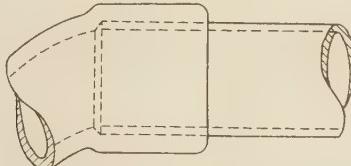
CAST-BRASS OR COPPER RECESSED FITTING SWEAT-SOLDERED OR BRAZED TO COPPER-ALLOY PIPE
